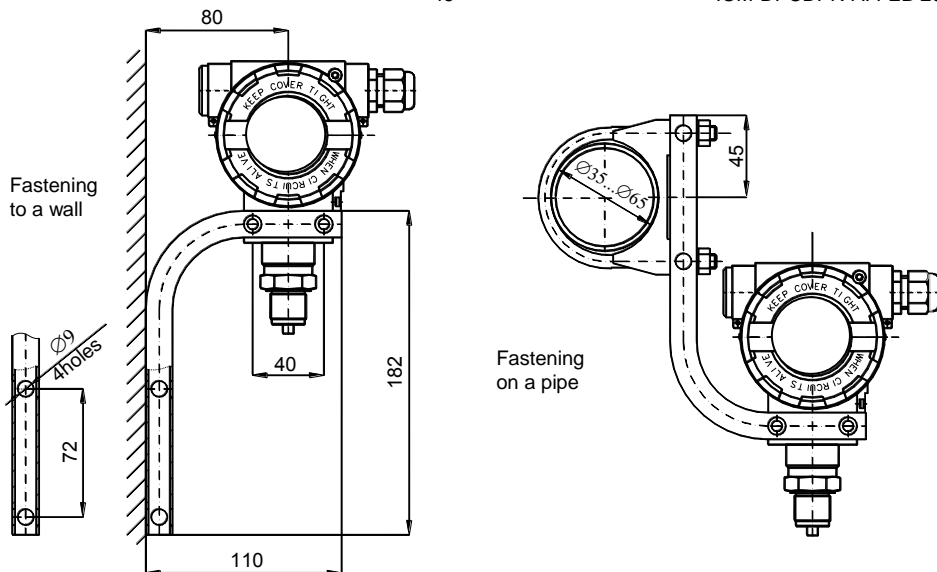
Example: how to install the DPC..., DPR... transmitter
